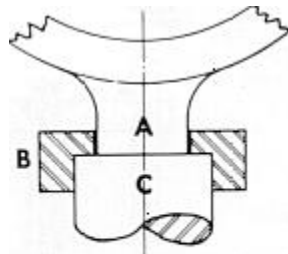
(A) lower boss of proving ring; (B) ring alignment bushing; (C) jack ram.
